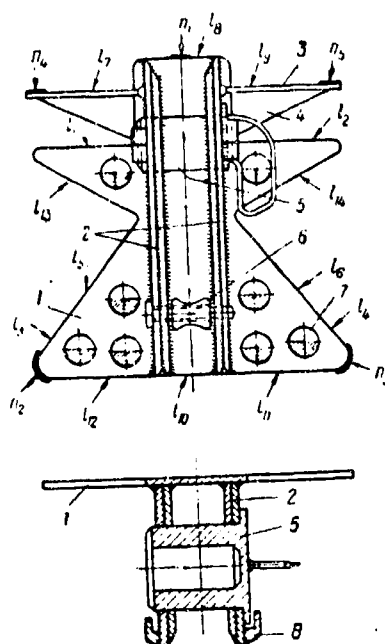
Ship-Hoisting Lug: 1- main sheet (base); 2- reinforcing ribs; 3, 4- brackets; 5- plug; 6- rolls; 7- opening for electric rivets; 8- retaining unit;  $n_1 - n_5$  = sequence of tack-welding the lug; and  $l_1 - l_{14}$  = welding sequence.
